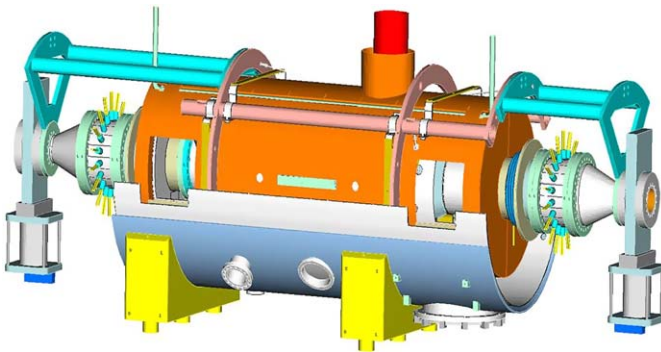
Cut away view of assembly of cavity cryostat and Helium line at BNL.
